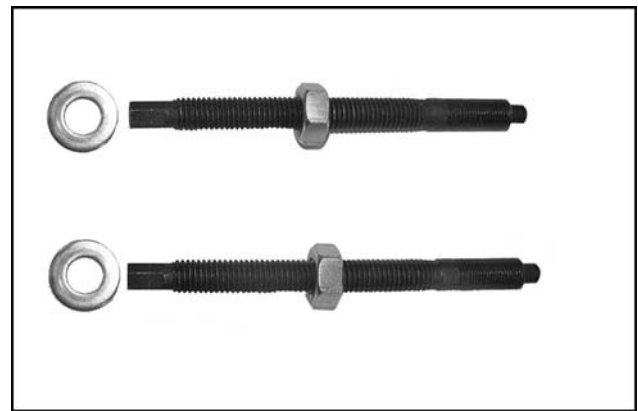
Crankshaft Secondary Flange Installation Studs, ZTSE4720
